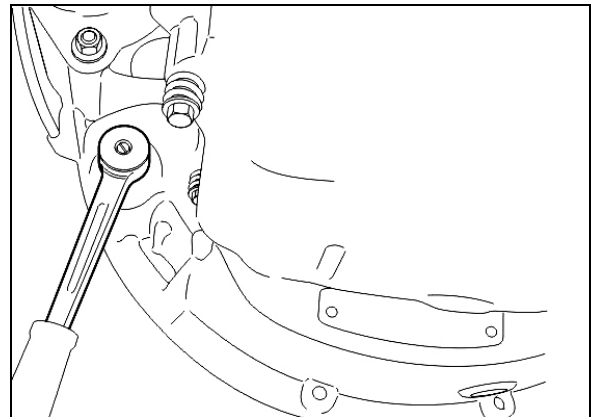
VOLVO ENGINE CRANKING POSITION
